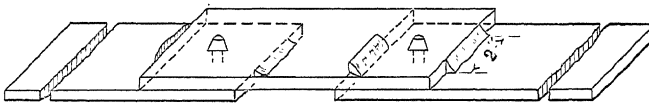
RIVETED AND FILLET WELDED.
